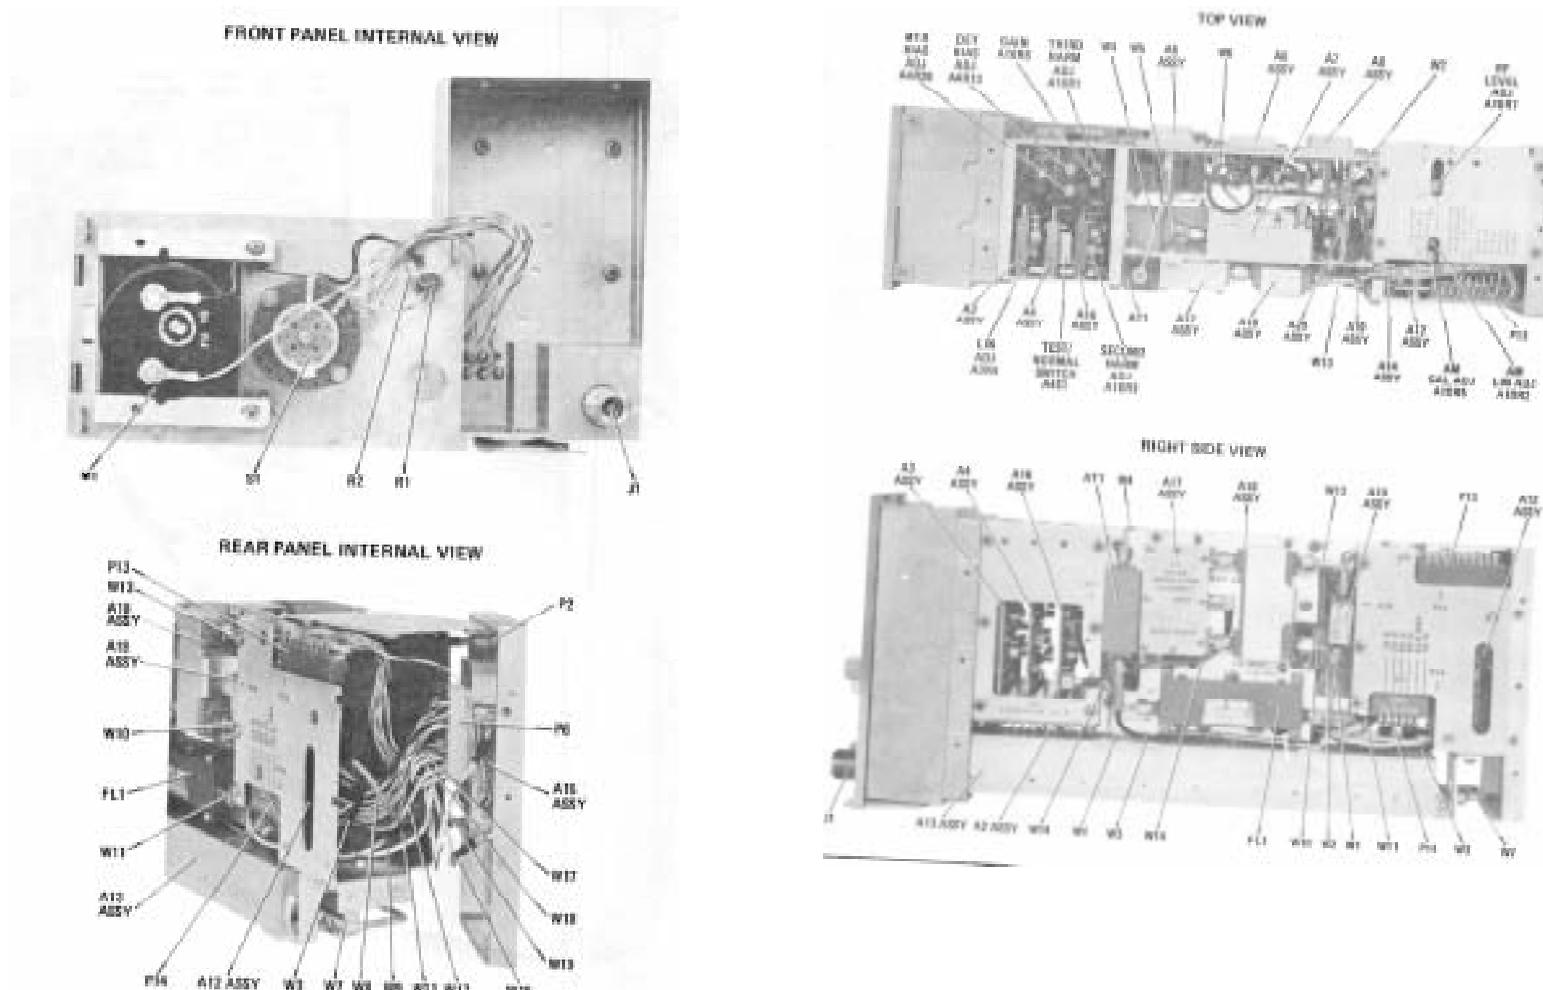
Assemblies, Chassis Parts, and Adjustable Component Locations
